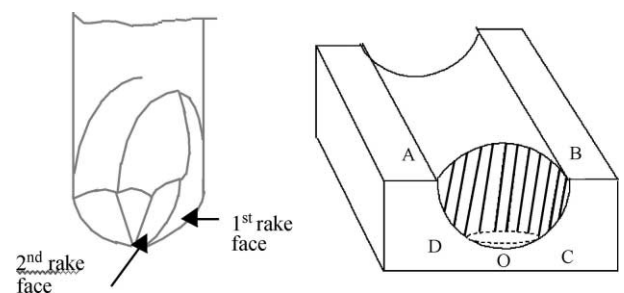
(A) Geometry of the ball-nose end mill cutter; (B) in-cut segment area of stable cutting.
